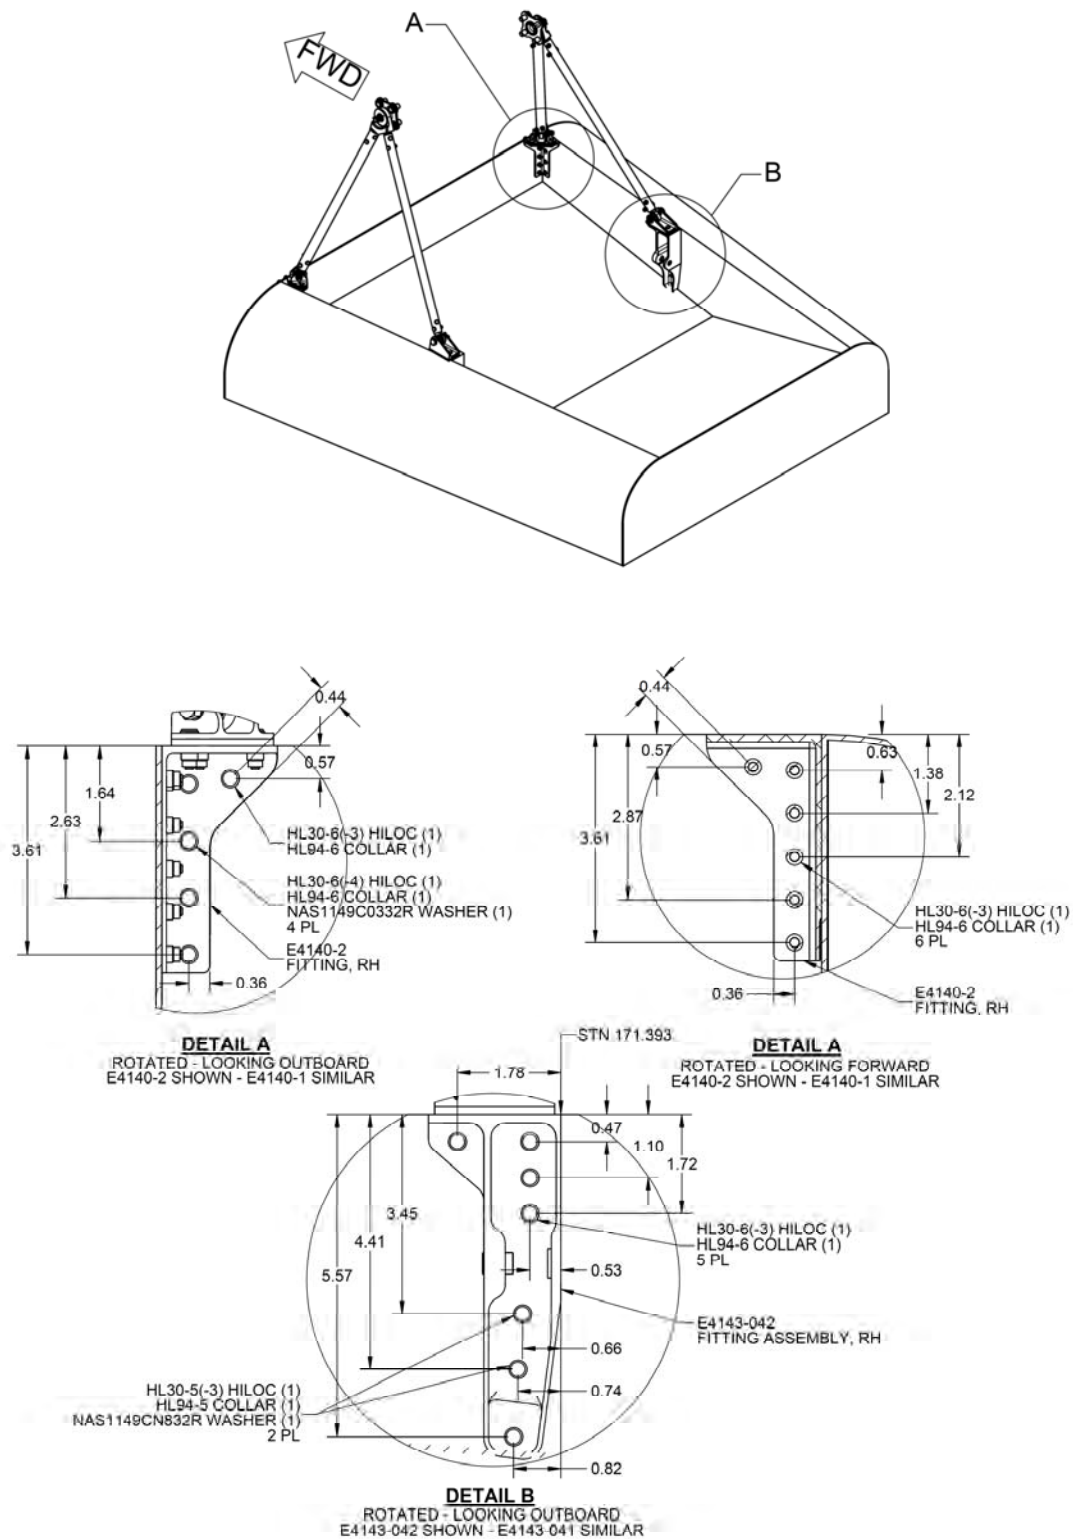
Bipod mounts (Sheet 1 of 3)
